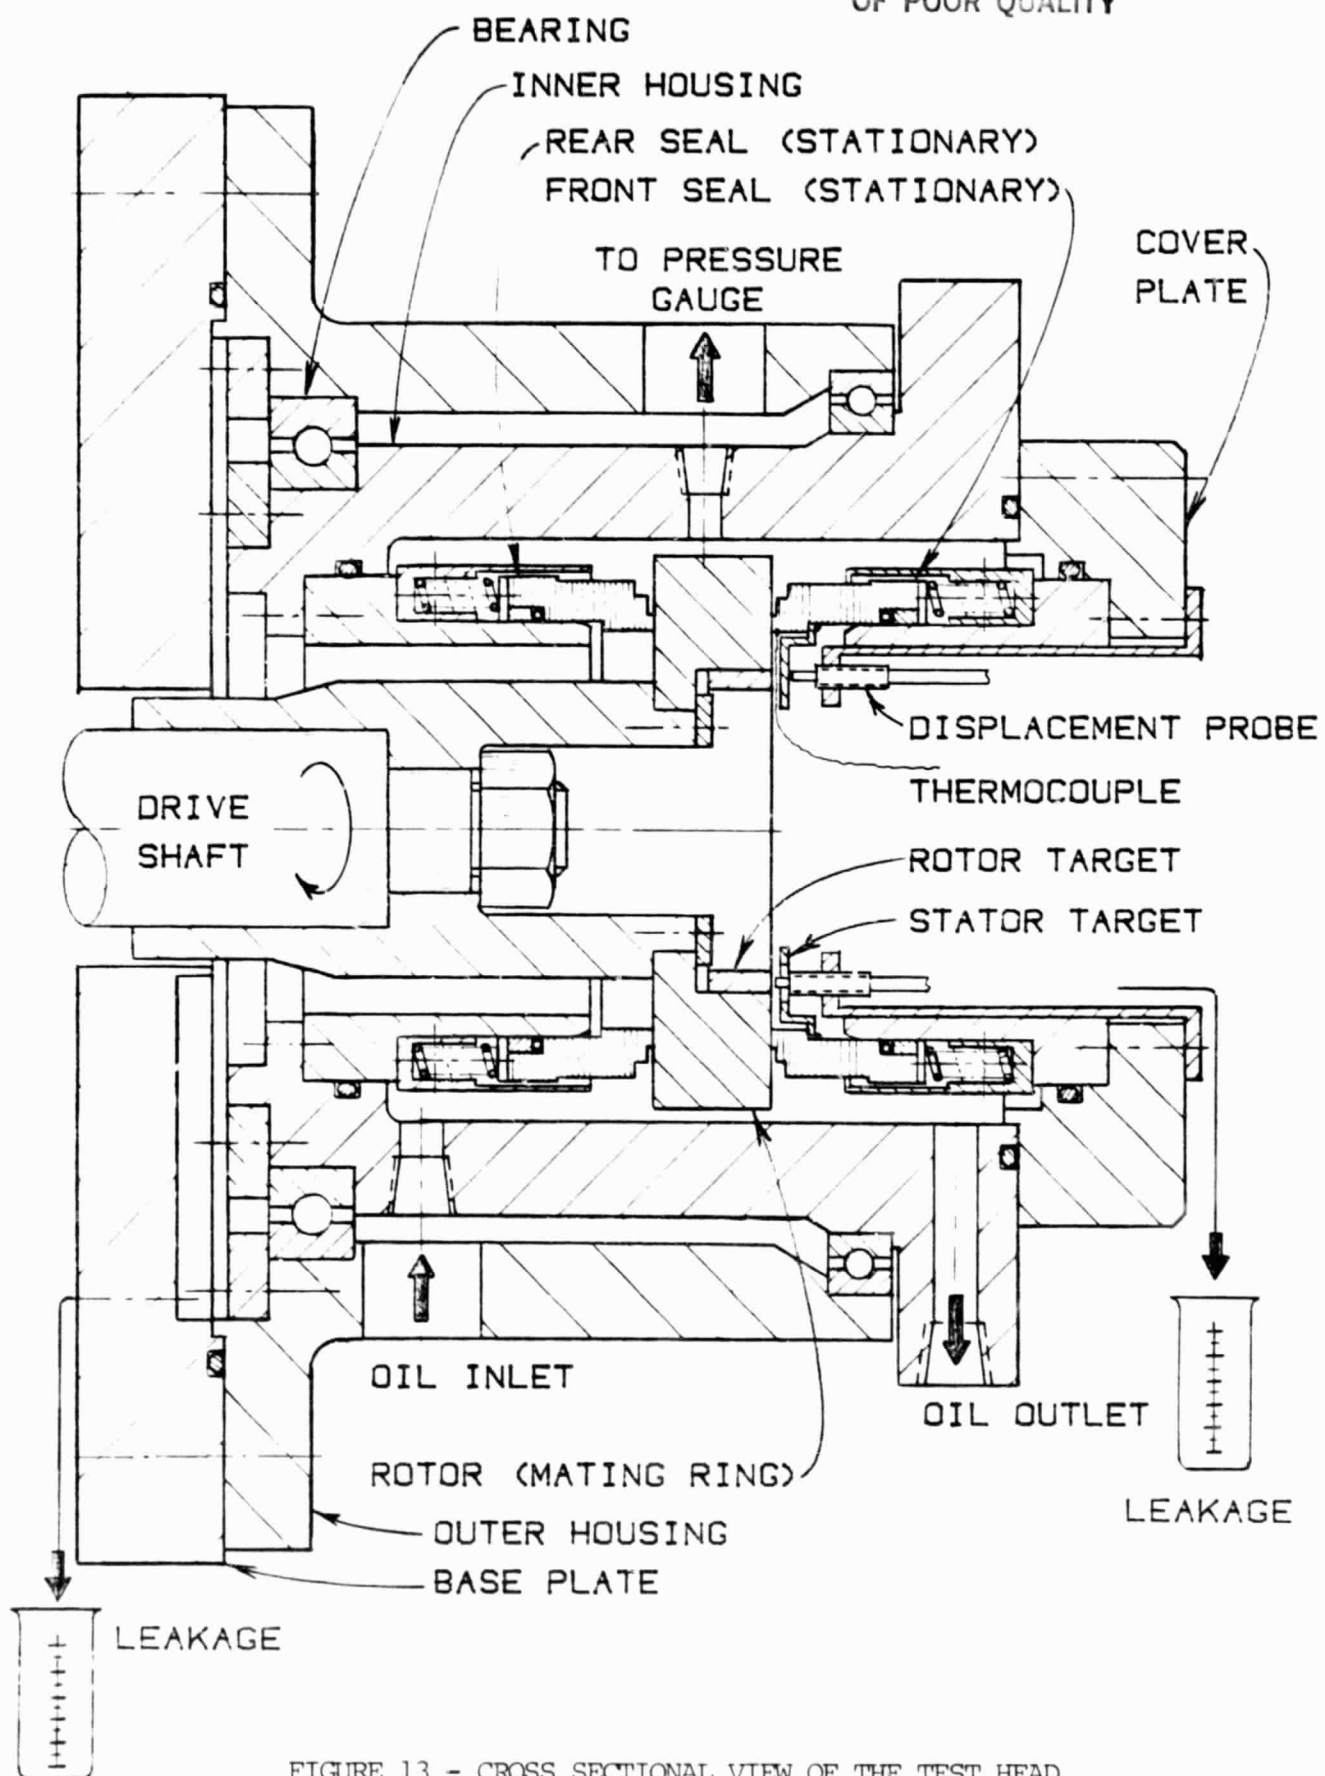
CROSS SECTIONAL VIEW OF THE TEST HEAD
